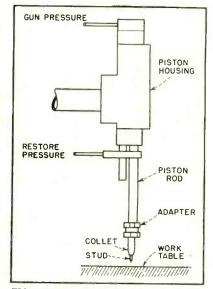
Welding gun used in assembly of developmental thyratron
